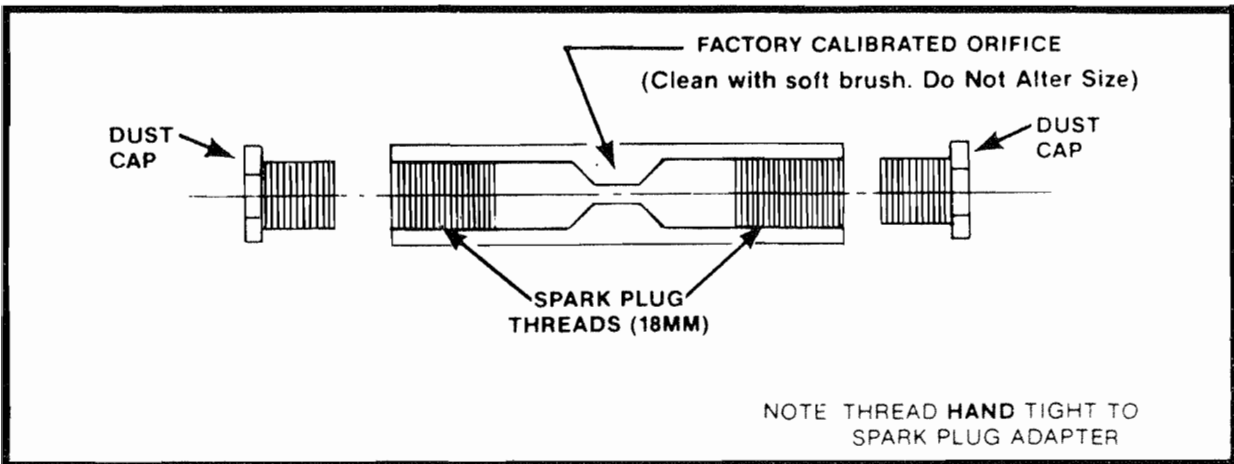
MASTER ORIFICE ASSEMBLY TOOL BORROUGHS P/N 646953.
